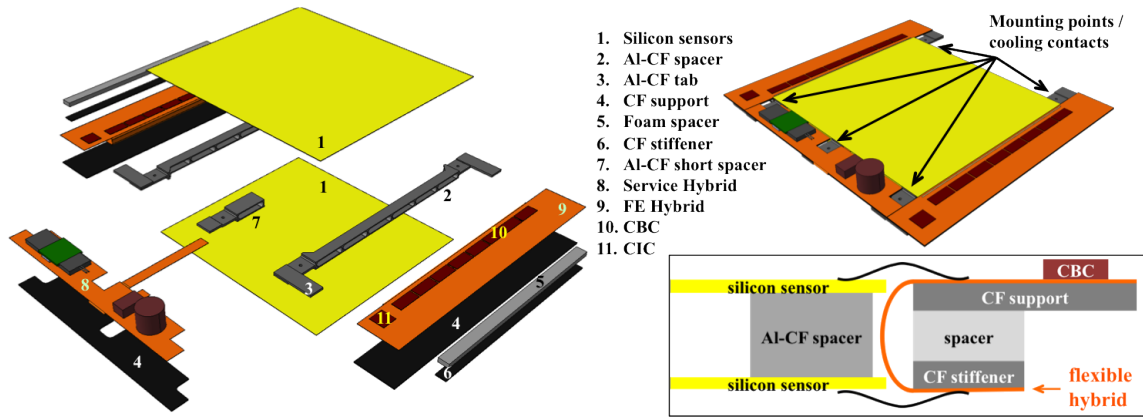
Exploded view of the 2S module components (left), 3D view of the assembled module (upper right), and a sketch of the FE Hybrid folded around its support (lower right). The module is mounted on five cooling elements on the mechanical support structure.
